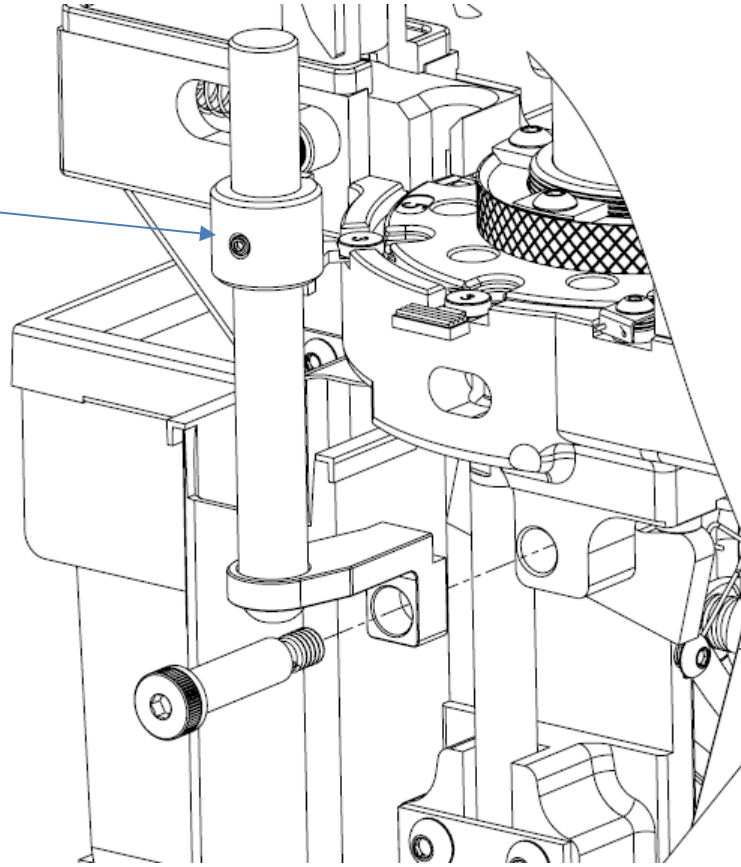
Mounting station 8 adapter to the RL1100 frame.
